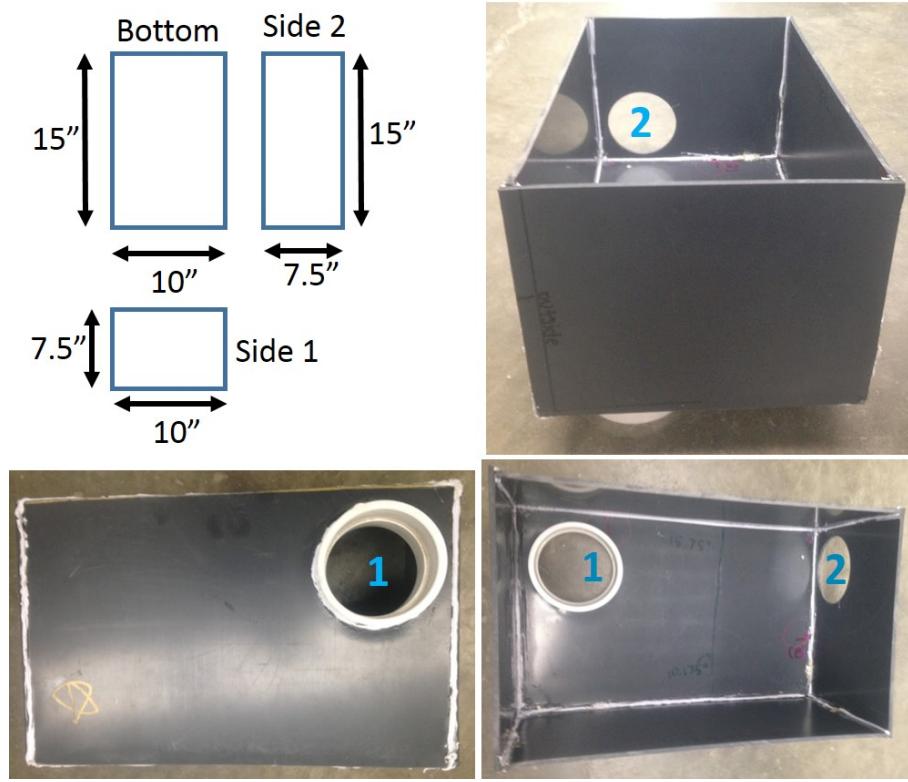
Entrance tank with dimensions (top left), side view (top right), bottom view (bottom left), and top view (bottom right). Orifice 1 is the outlet from the entrance tank. It is a 3 inch pipe coupling welded onto the bottom of the tank, intended to hold the LFOM within the tank and the flocculator connection below it. Orifice 2 is the inlet to the entrance tank, welded onto a 10in x 7.5in wall opposite orifice 1.
